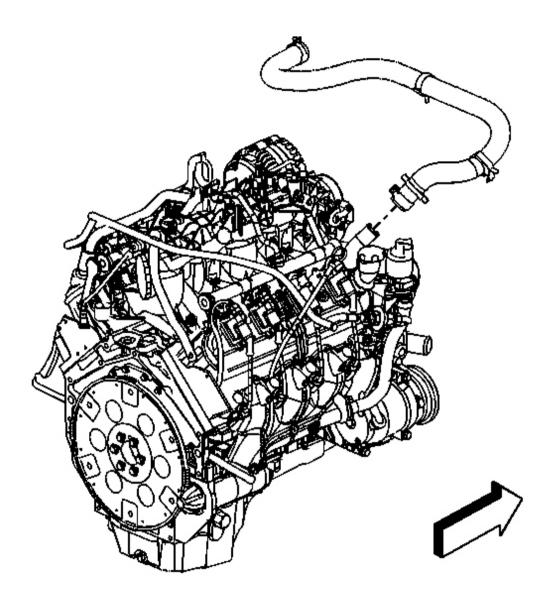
Inlet Hose & Water Pump (4.8, 5.3, & 6.0L) Courtesy of GENERAL MOTORS CORP.
